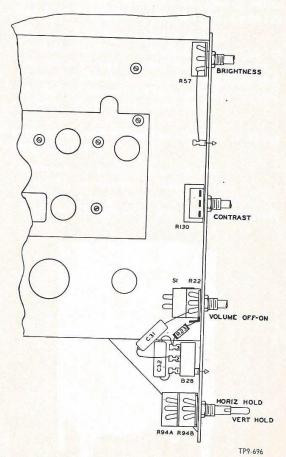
Partial Top View of Model 50-T1630, Showing Components Located on Control Panel
